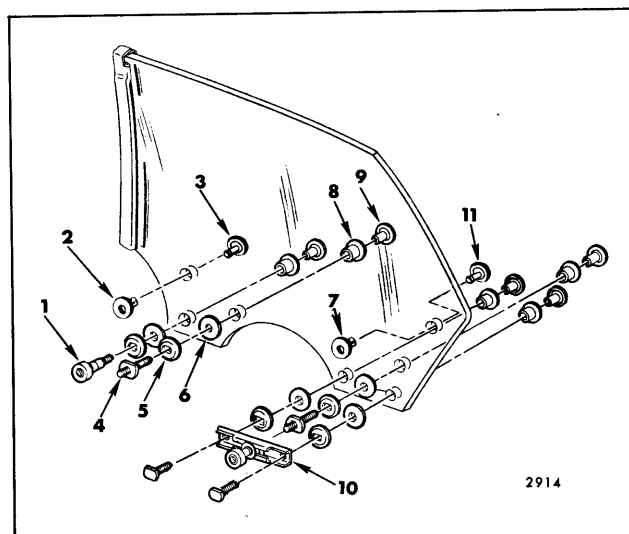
Rear Door Window Assembly - "A-39" Styles
